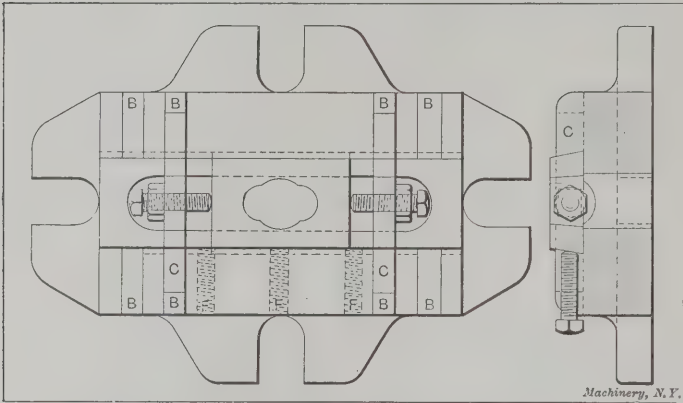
Die-bed of the Dovetailed and Side Set-screw Type, also secured by End-thrust Set-screws
